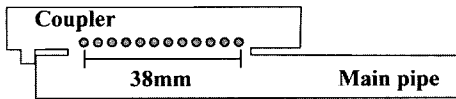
Geometry of the 75A welded pipe fitting.
